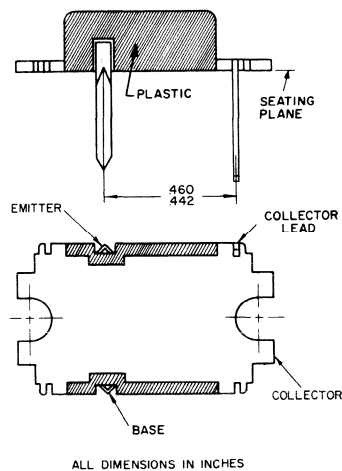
TO-219AA plastic transistor package designed for mounting on printed-circuit boards.
